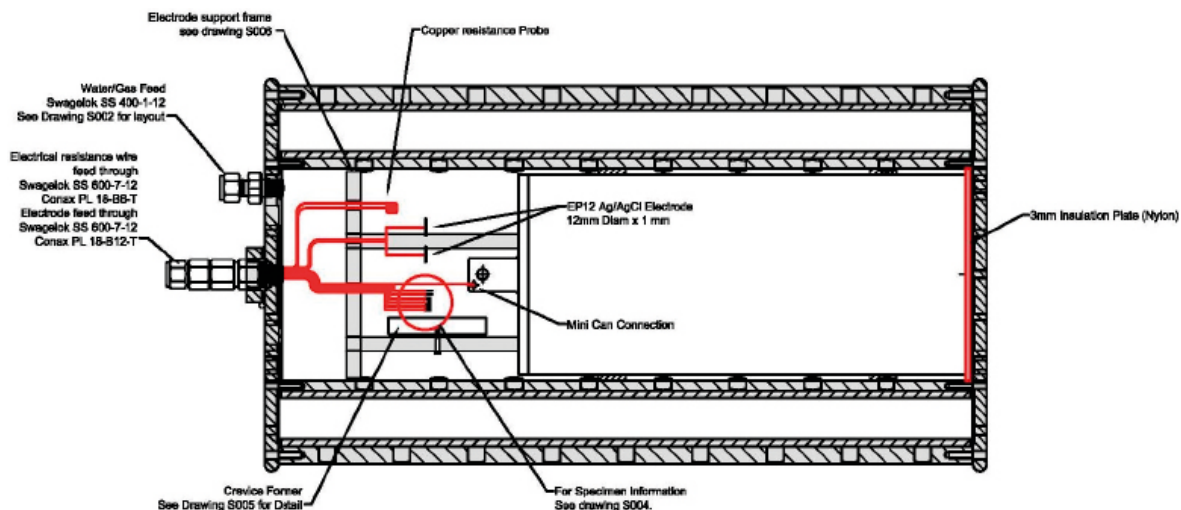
Layout of canister and external samples inside the support cage, as it would have been positioned inside the borehole. The external samples in the space in front of the canister are positioned vertically lower than the machined defect at the top of the canister, implying corrosion at this point would mean water would have been present around all of the external samples. Note that in MiniCan 4 high density bentonite surrounded the canister and the external samples.
